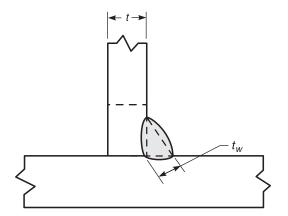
Fillet Welds (see 2.2.2)
